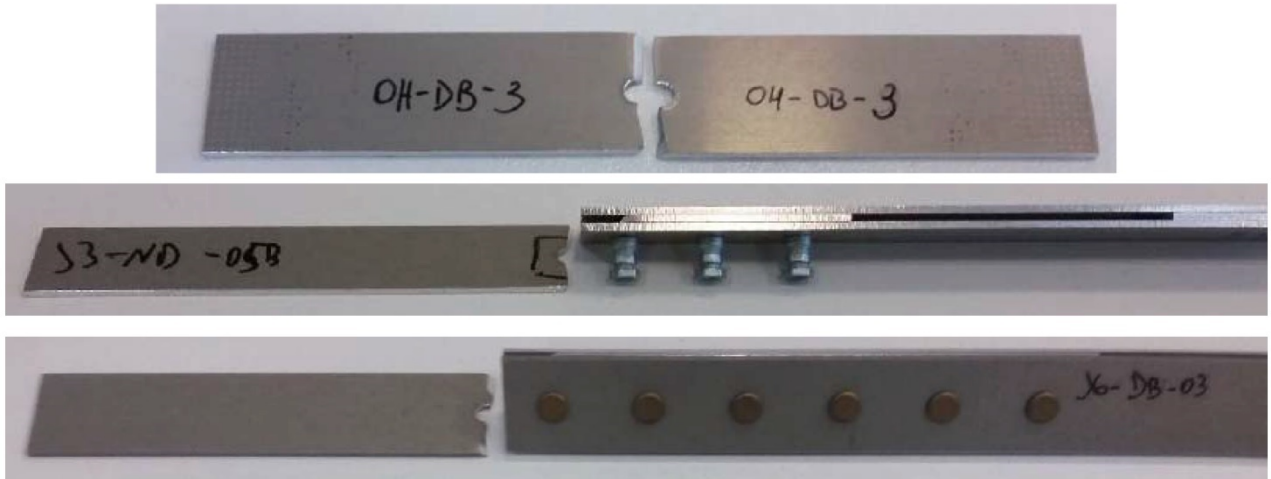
Examples hybrid Aluminium-Composite joints for One-Up Drilling.
